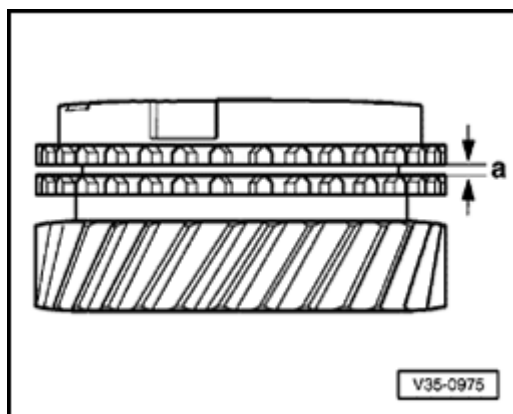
Checking synchro-ring for 5th and 6th gear for wear
